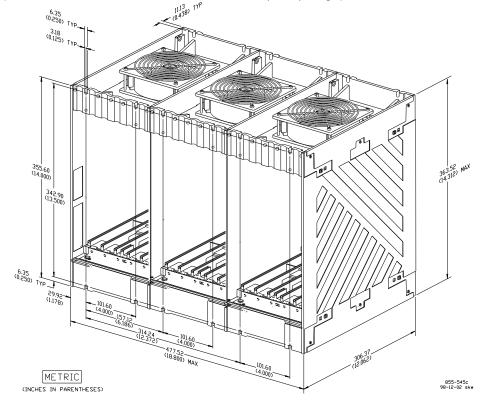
Outline Drawing of MicroNet TMR Main Chassis
